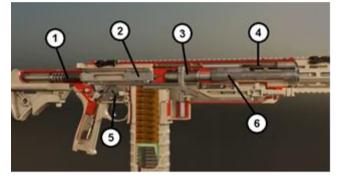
3D model of the possible design of the 6.8 mm NGSW-R assault rifle prototype made by "Textron" [15]. 1 – two-component recoil mechanism with a buffer device; 2 - bolt carrier group; 3 - chamber; 4 - spring loaded piston; 5 - trigger mechanism; 6 – barrel.
